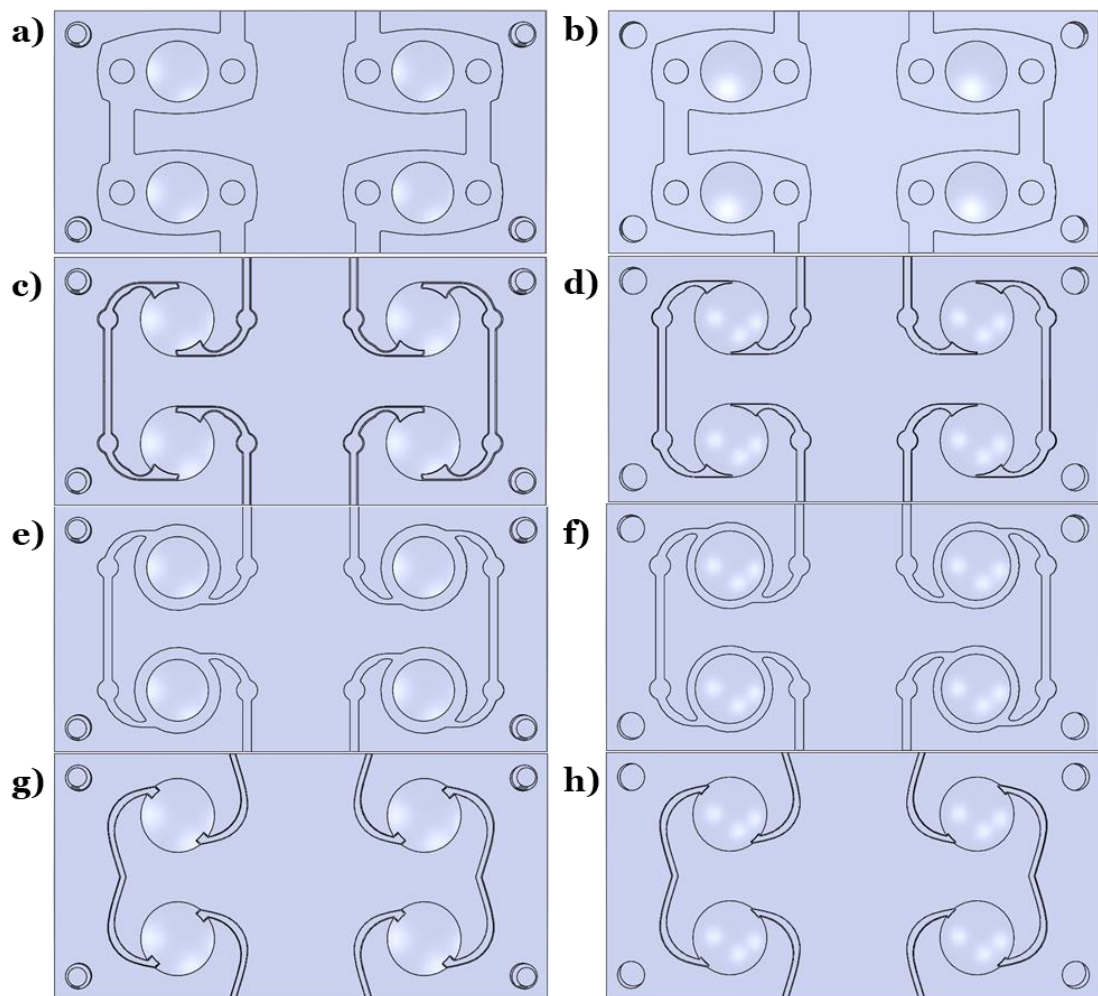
Schematics of IOL moulds designs based on commercial products (Figure 2.21): a) Design 1 cover part; b) Design 1 bottom part; c) Design 2 cover part; d) Design 2 bottom part; e) Design 3 cover part; f) Design 3 bottom part; g) Design 4 cover part; h) Design 4 bottom part.
